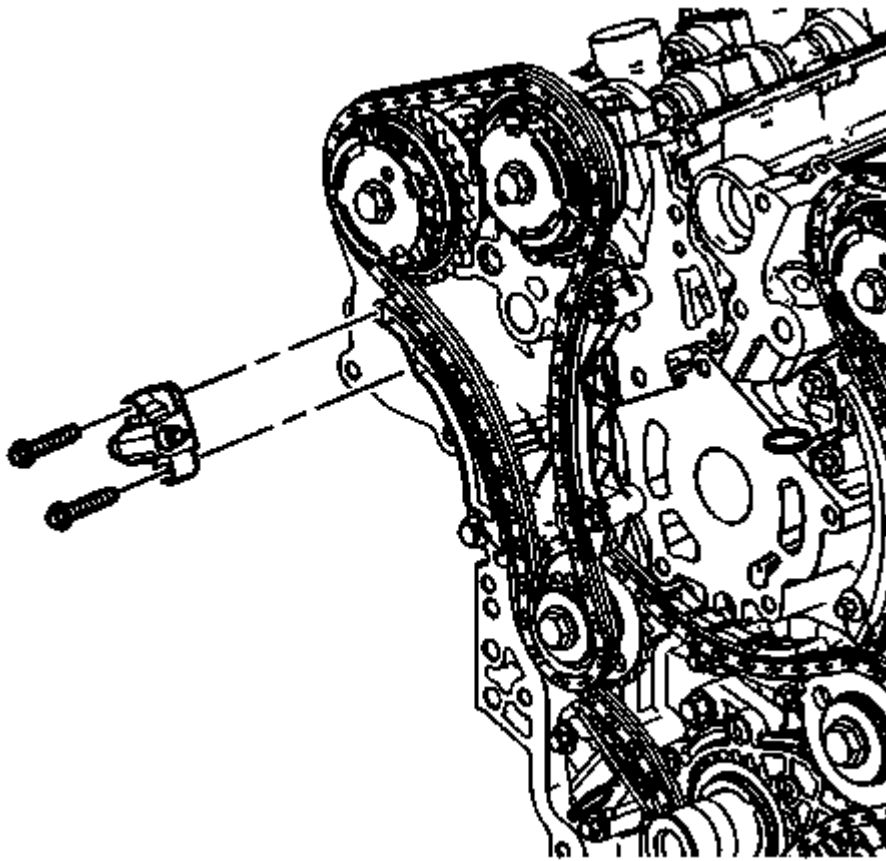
View Of Right Bank Secondary Camshaft Drive Chain Tensioner
